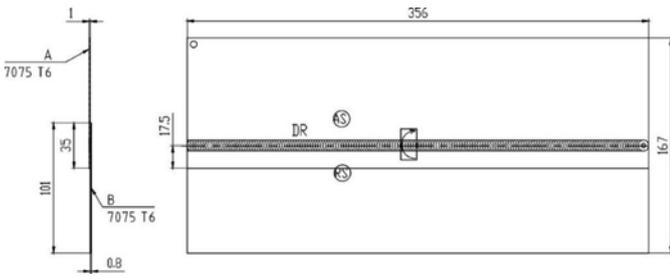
The test joint welded during the FSW tool wear test
